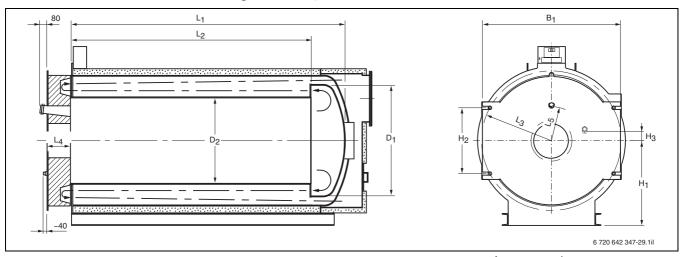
Combustion chamber dimensions Logano S825L, boiler sizes 650 to 5200 (dim. in mm)
